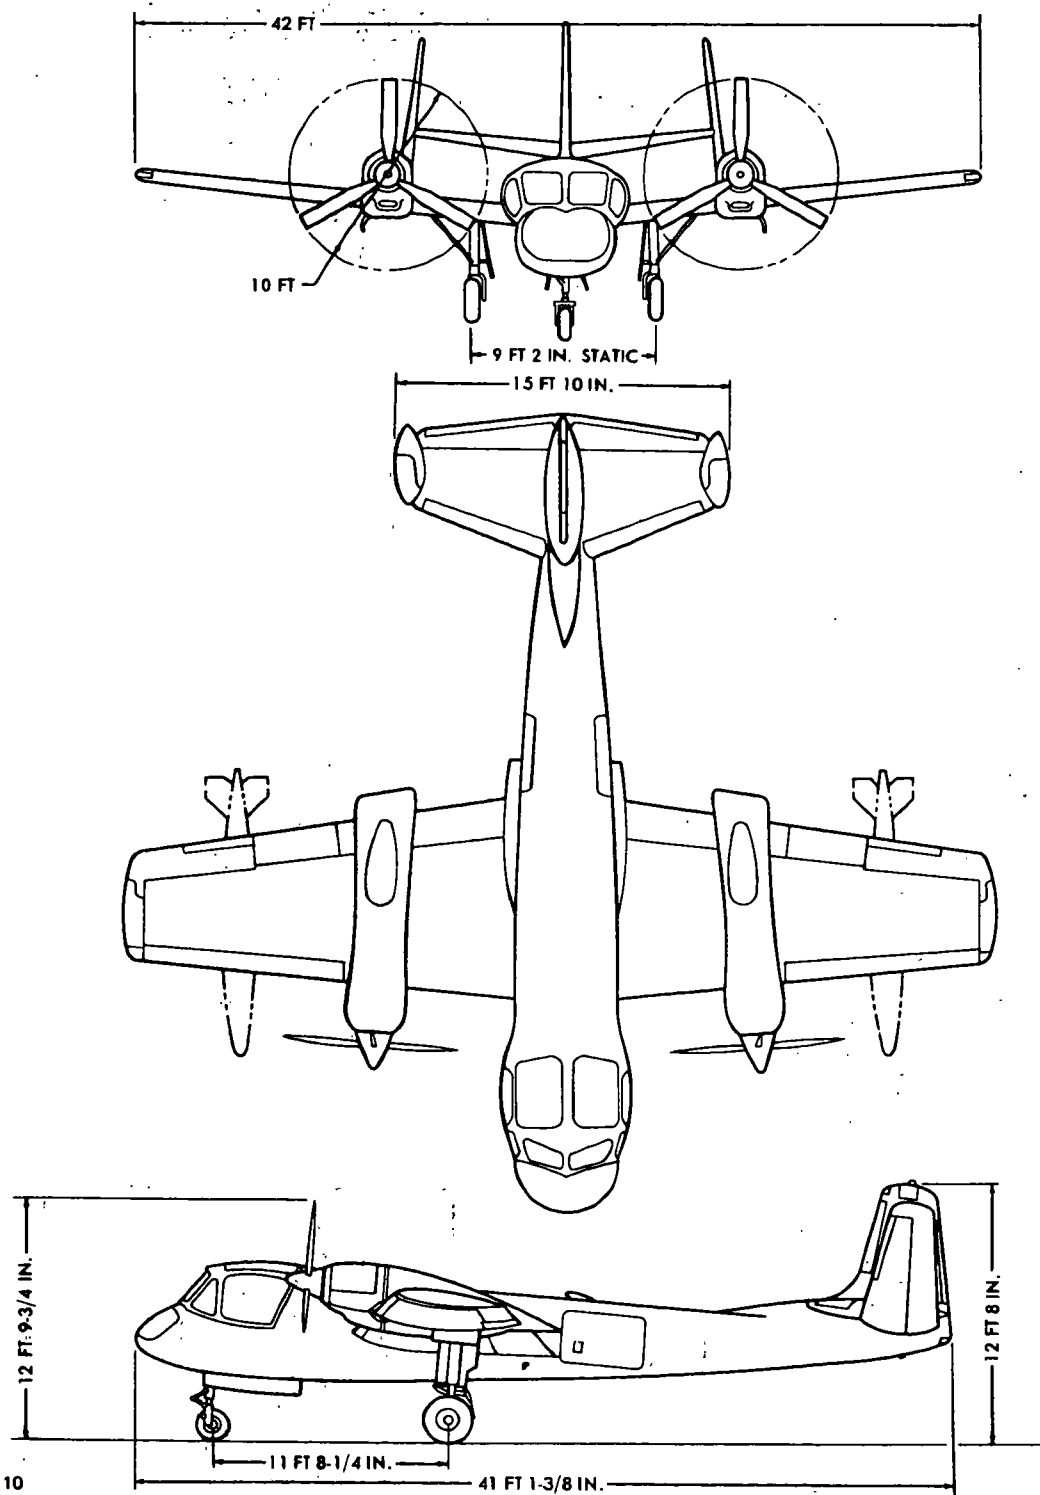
Principal dimensions, OV-1A and C (Mohawk)
